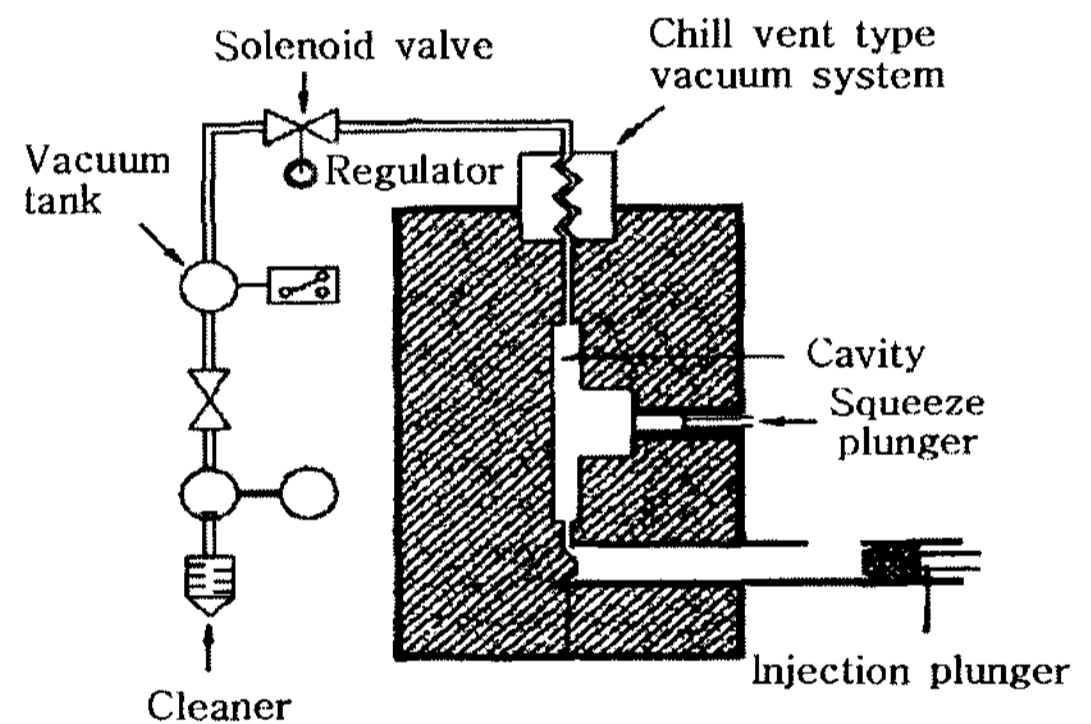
Schematic drawing of partial squeeze and vacuum die casting machine
